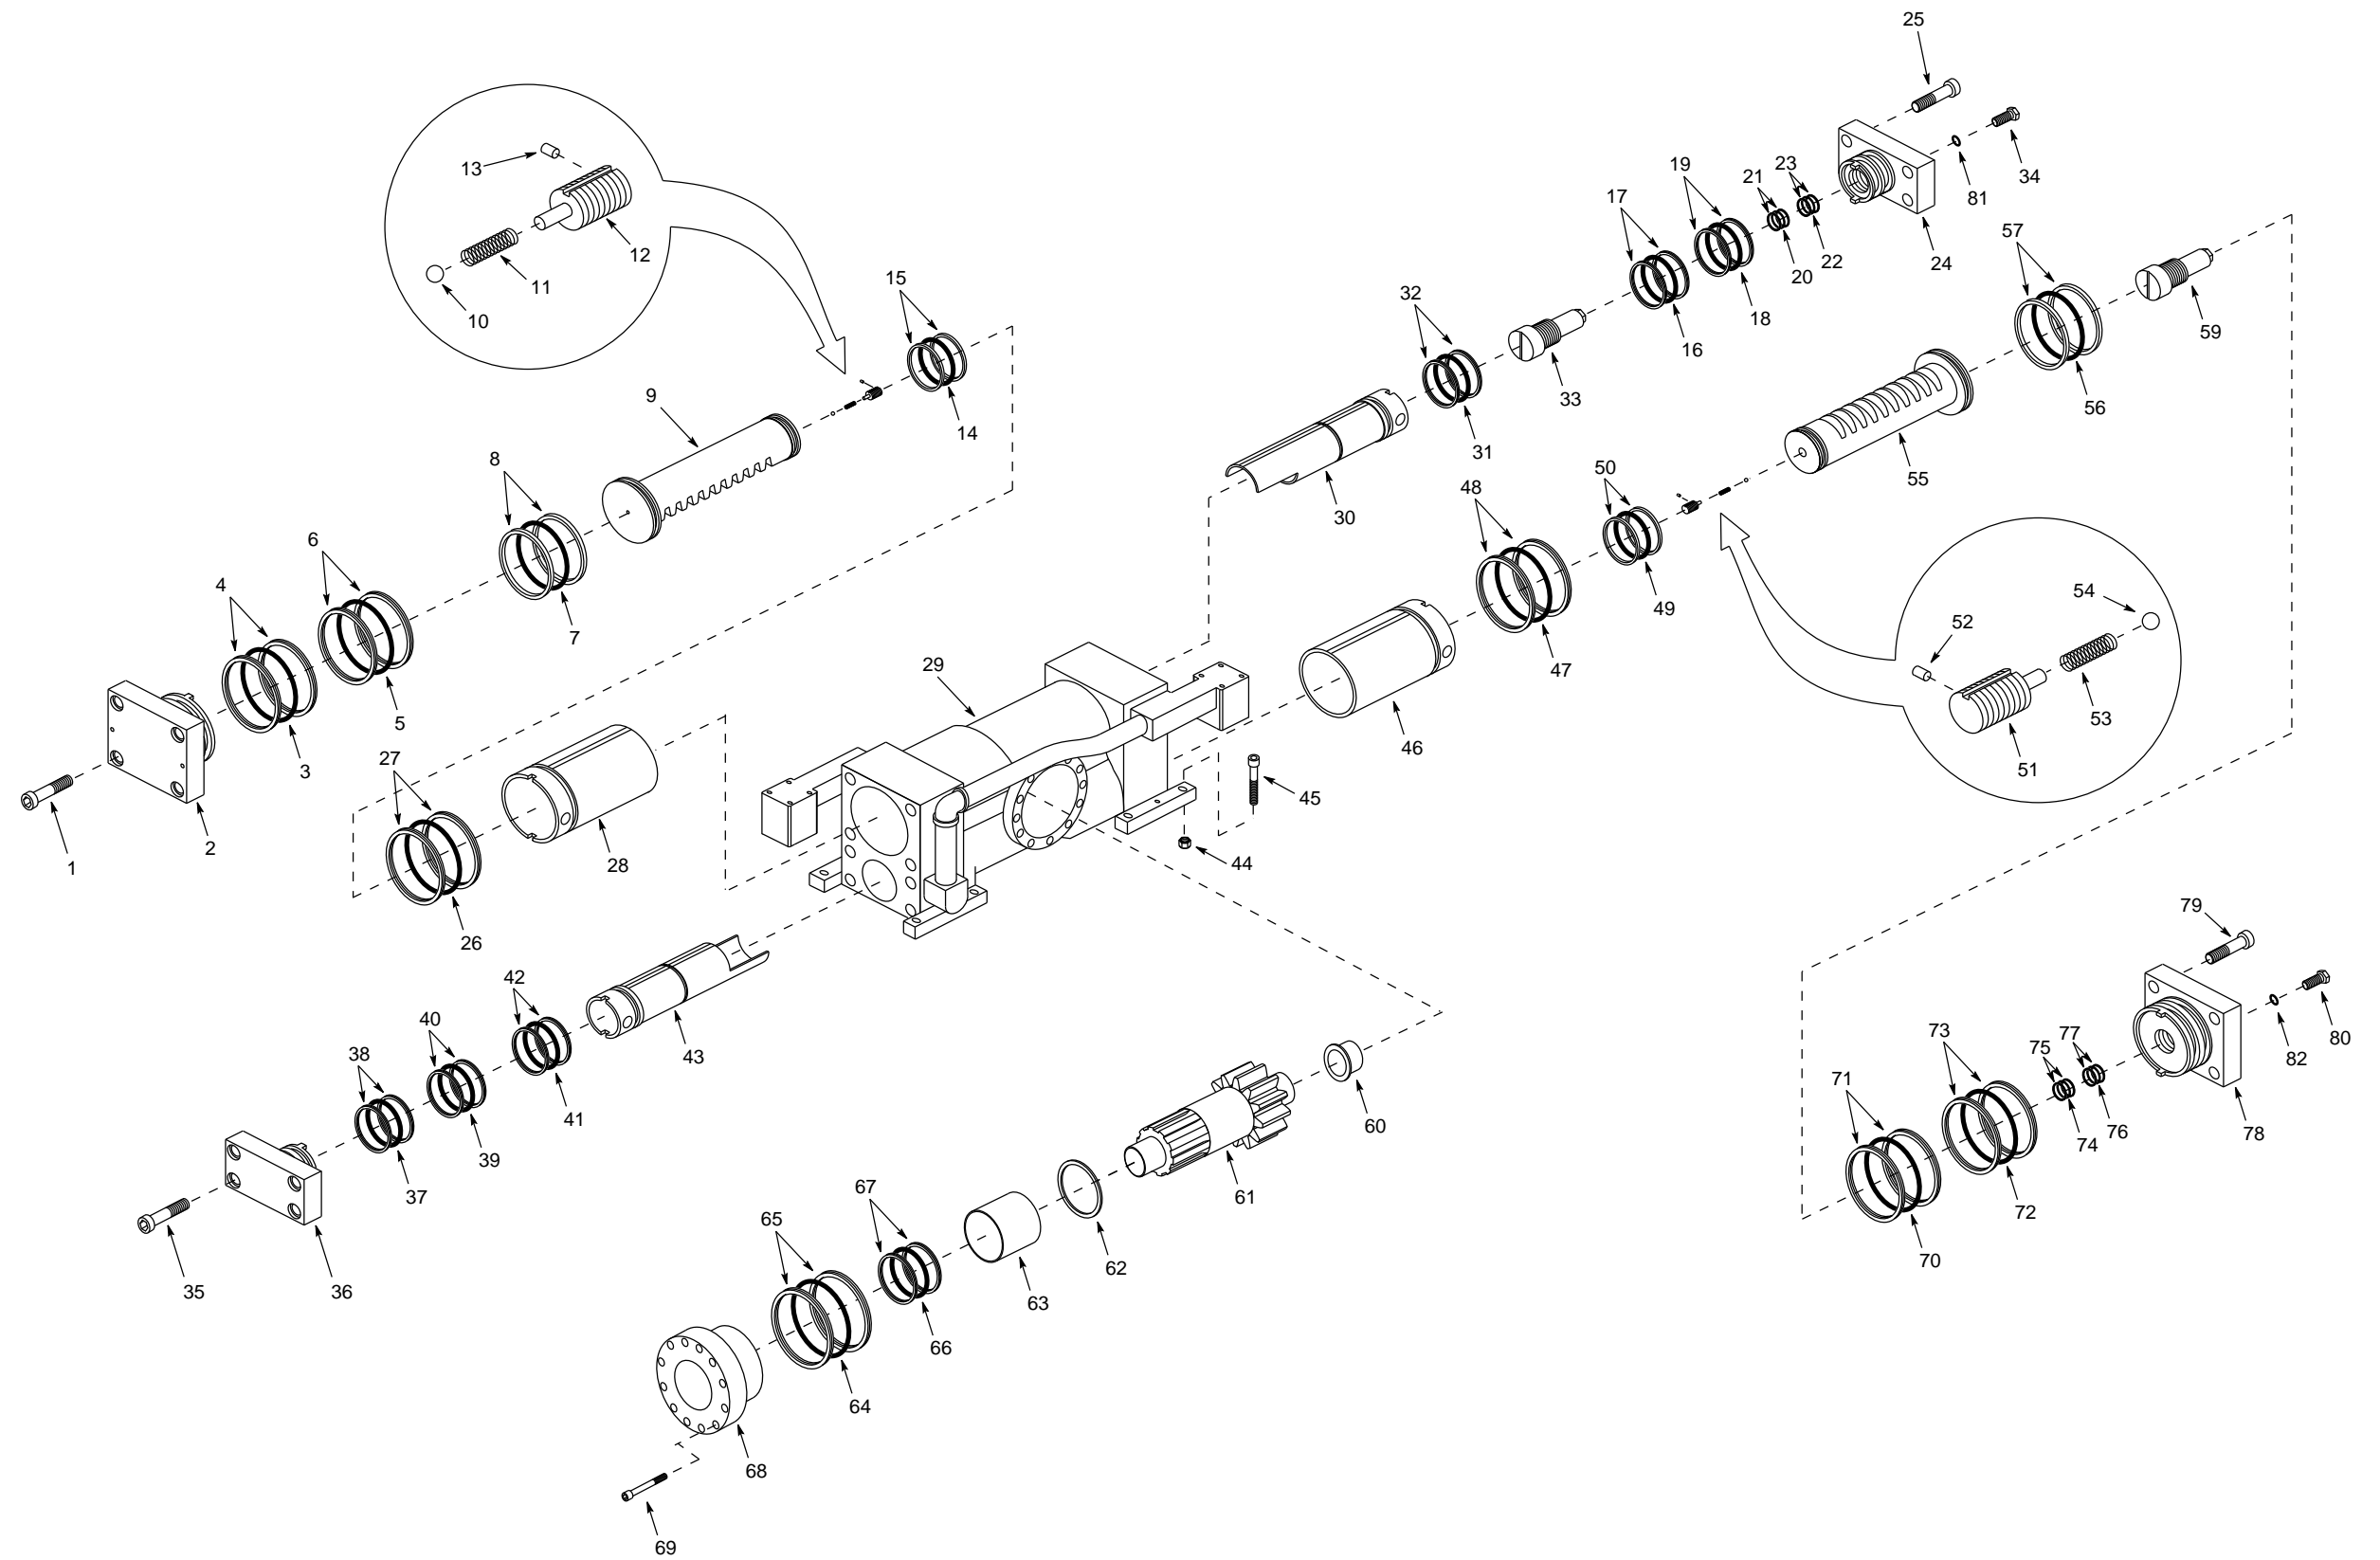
Muzzle Hatch and Fairing Rotary Actuator
